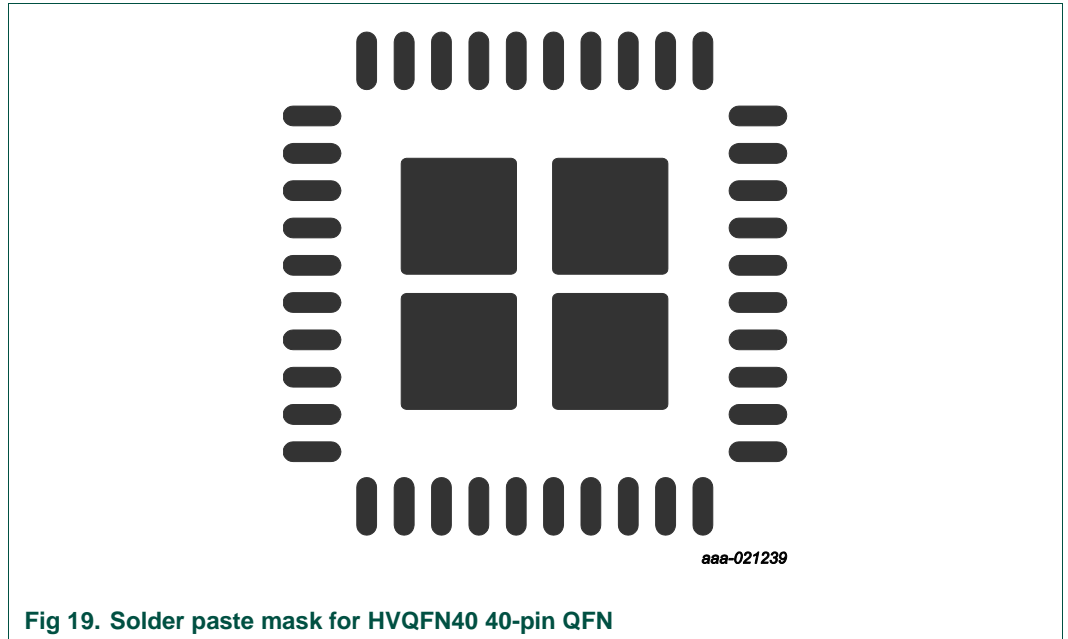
Solder paste mask for HVQFN40 40-pin QFN
